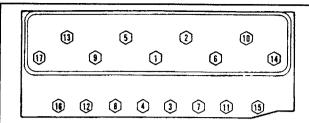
Cylinder head tightening sequence-5.0L/5.7L/6.2L V8 engines
